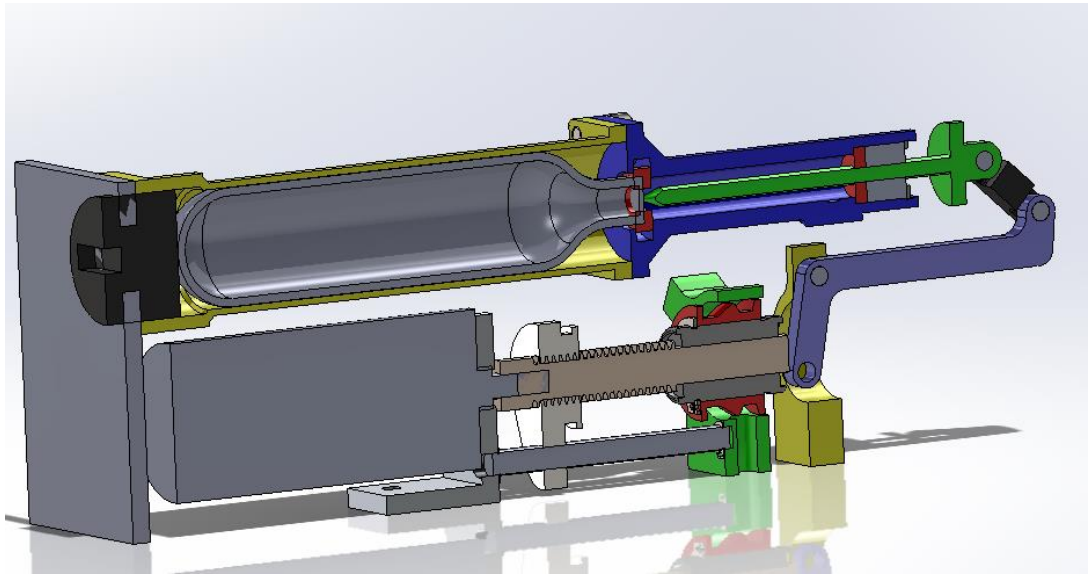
Overall CAD Drawing of the Piercing Mechanism
